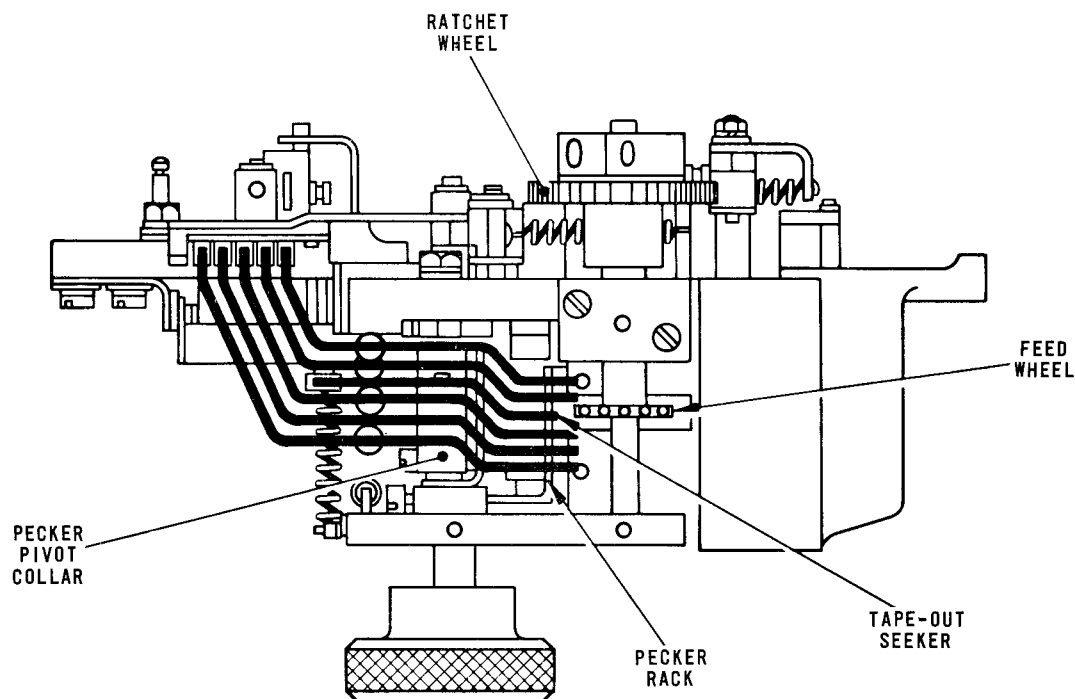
PLAN VIEW (TAPE PLATE REMOVED)
